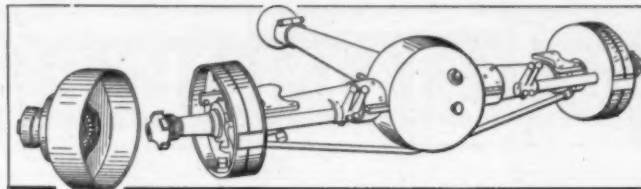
Rear axle, showing ball-shaped differential housing and brake details
